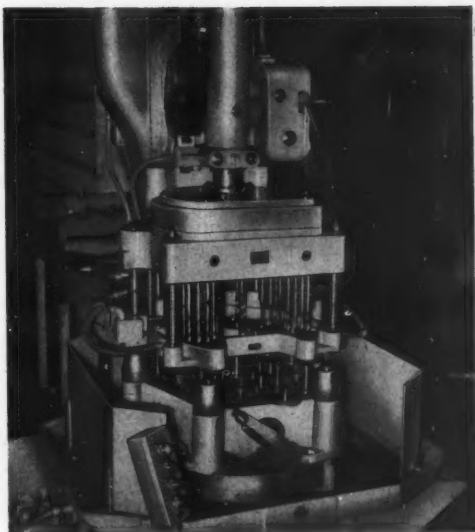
Drilling, reaming and chamfering operations on the nine holes in the cover are carried out on this Pollard multi-spindle drill. Each casting makes two circuits of the table
